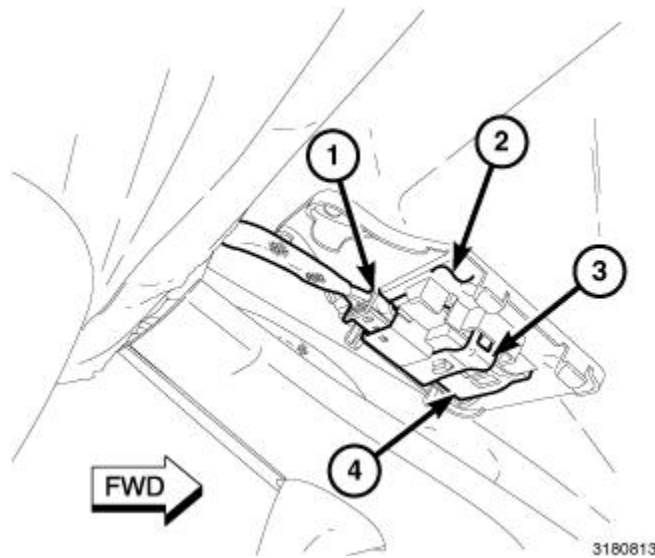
Wire Harness Connector, Humidity Sensor, Bracket & Clip
